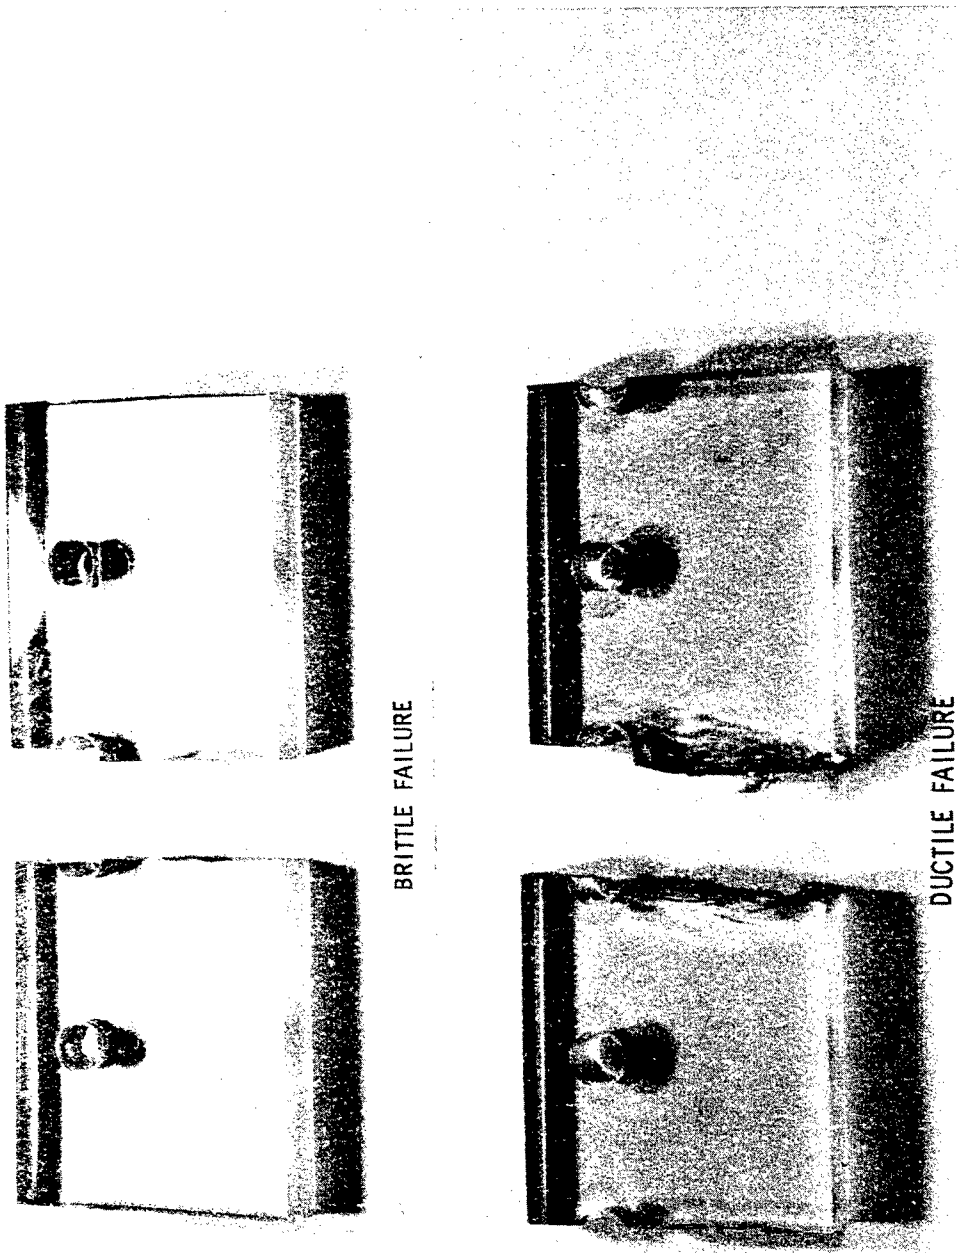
Photograph of Failed Edge Attachment Specimens,
